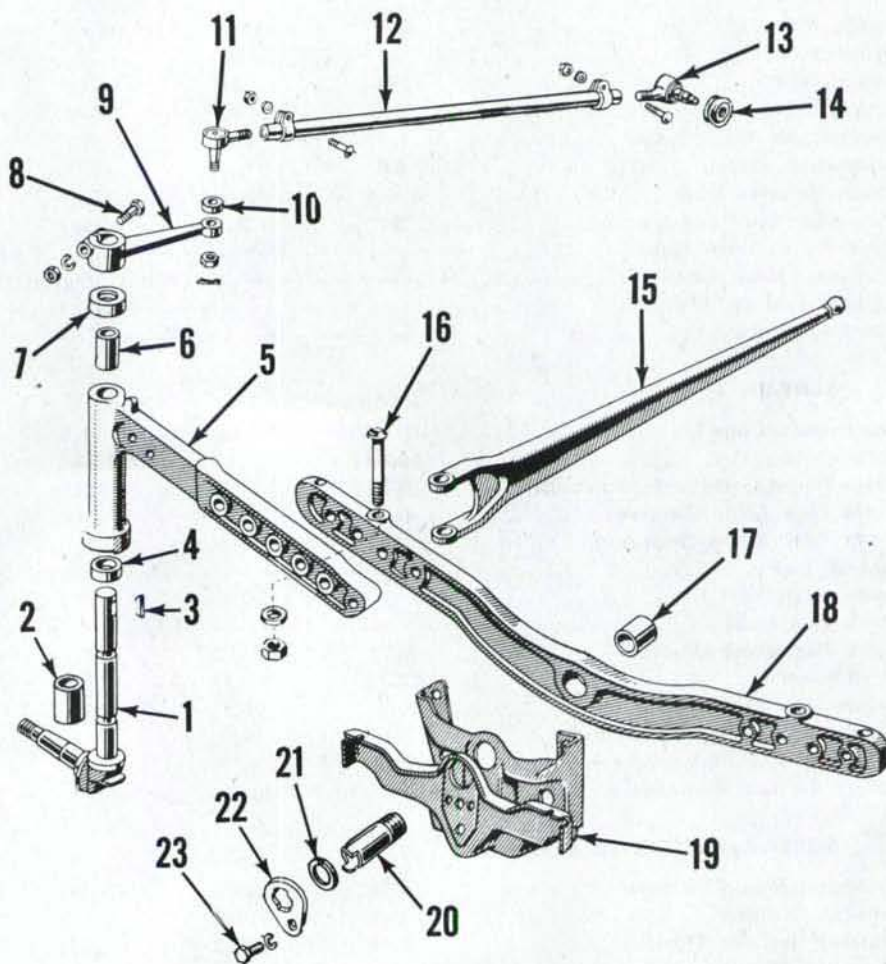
Exploded view of All-Purpose type front axle and related parts. Optional "heavy duty" front axle is similarly constructed except that pivot pin (20) has hex head, snap ring (21) is not used and retainer (22) has hex opening for pivot pin head. A flat washer (not shown) is used on cap screw (23) between retainer (22) and front support (19) on "heavy duty" assemblies to prevent retainer from being cocked. Early production pivot pin was not threaded and pivot pin (20) and retainer (22) were integral welded assembly.
